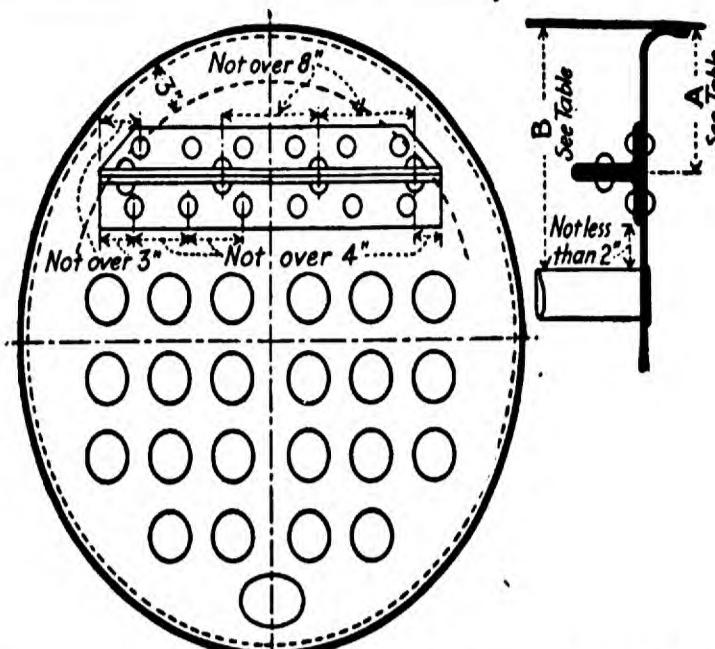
Staying or Head with Steel Angles in Tubular Boiler.
